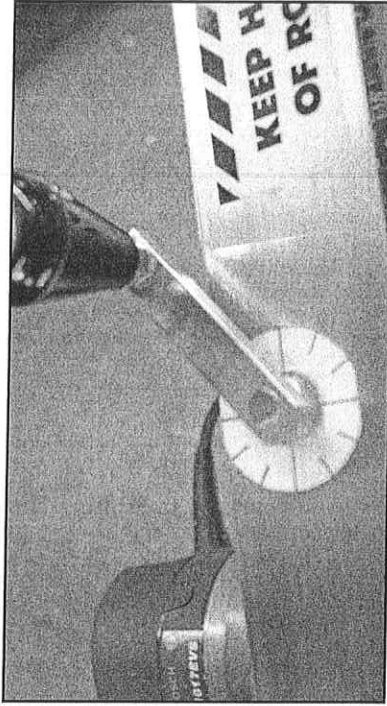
Crossfeed measurement consists of both the crossfeed reading per the scale and the crank handle position.
